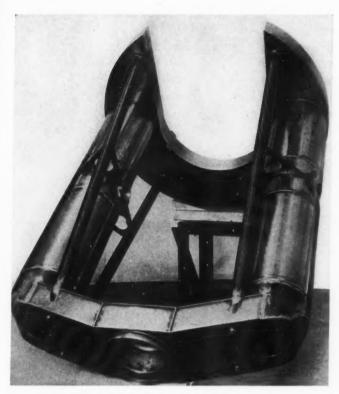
Extensive use of welding on this yoke assures complete rigidity of the structure
